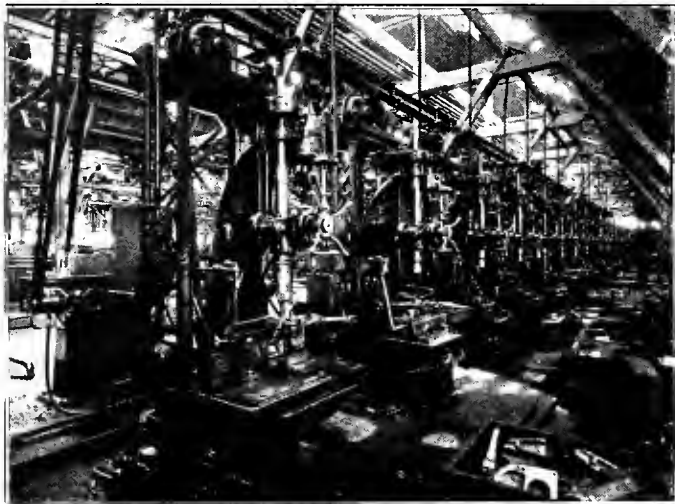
A line of heavy duty drills in the Holt plant, all having unit drives. The work performed by this battery of machines is such that this type of drive is more flexible and more economical.
